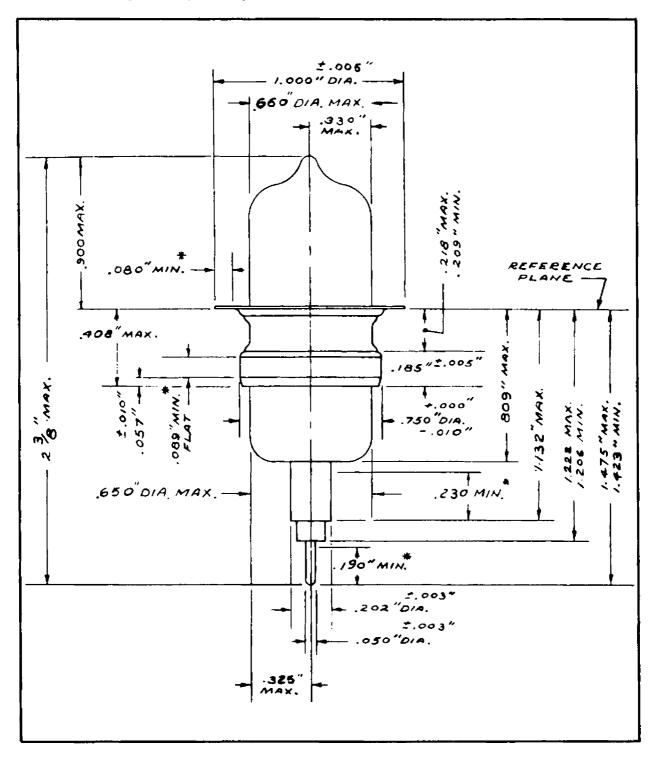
Outline drawing showing the dimensions that are necessary for designing cavities. The dimensions are for the 2C36, 2C37, 5764, and 5765.
